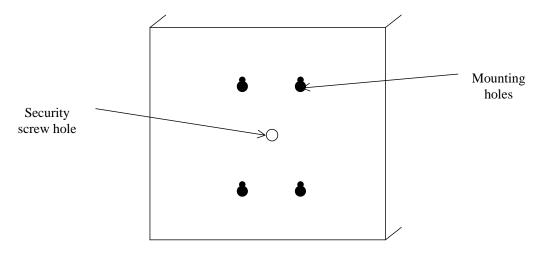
MODULAR UNIT Back plate with screw fixing holes
